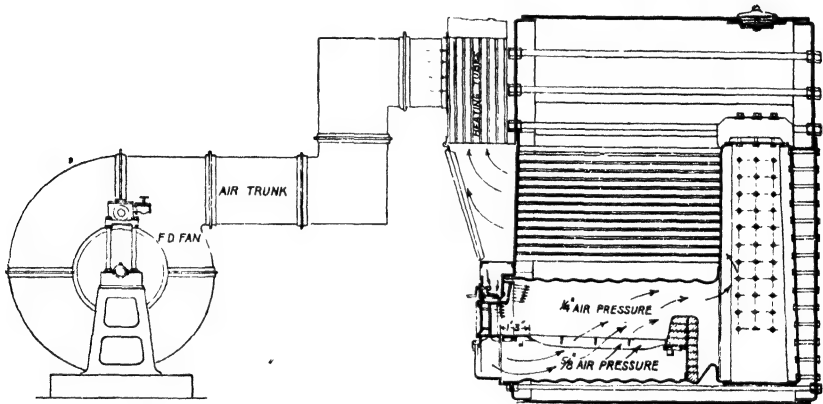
Sectional View of Marine Boiler with Regular Forced Draught
